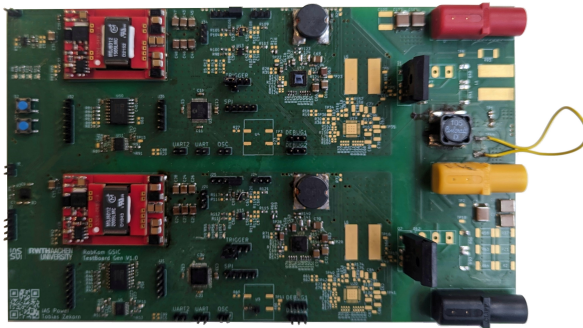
Test PCB for gate driver ASIC in a buck configuration.
